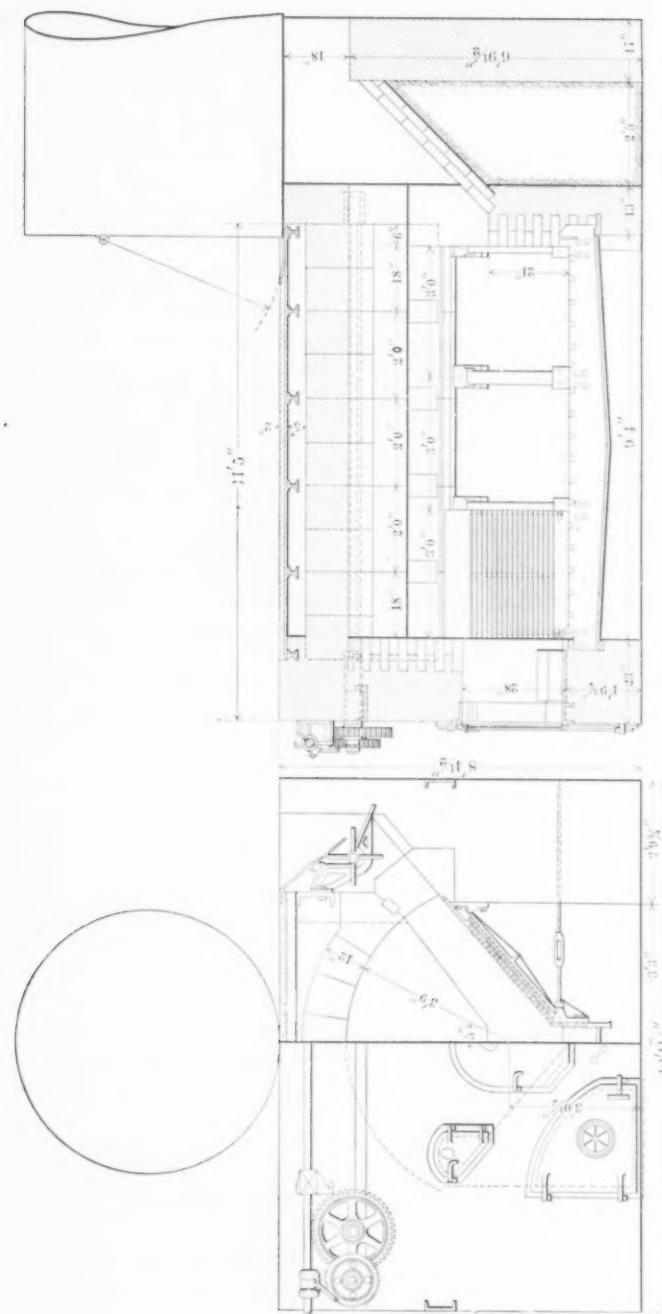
END AND SIDE SECTIONAL ELEVATION OF THE MYERS TAN-BARK FURNACE
